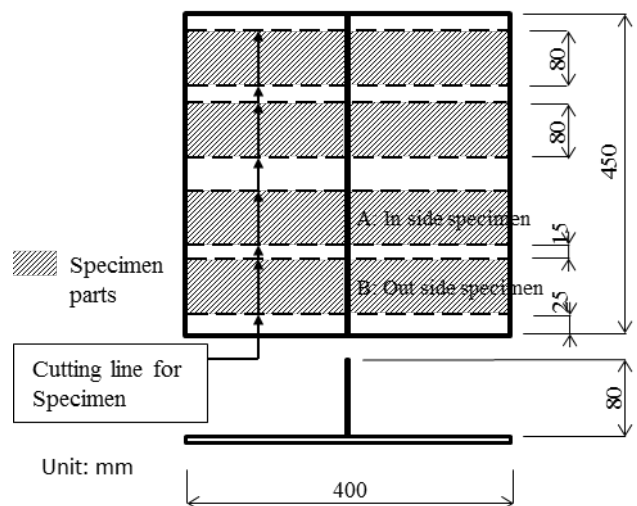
Fatigue test specimens cutting from Laser arc welded panel
